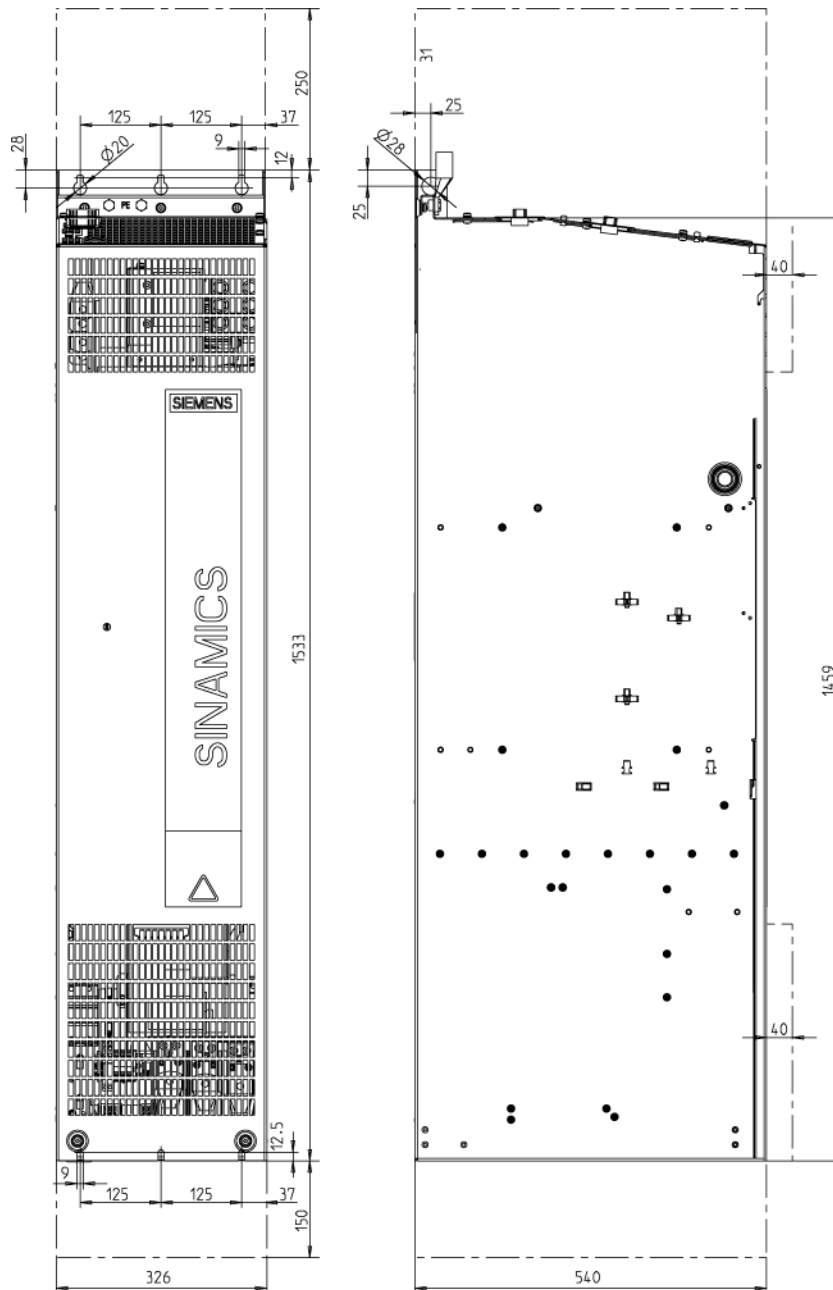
Dimension drawing Motor Module, frame size GX Front view, side view
